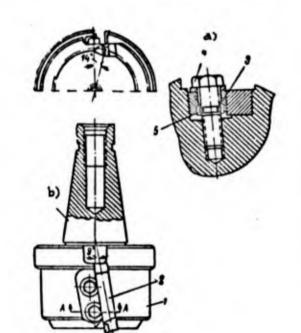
Design of Inserted-Tooth End-Milling Cutter, Carbide-Tipped, up to 100 mm Diameter
